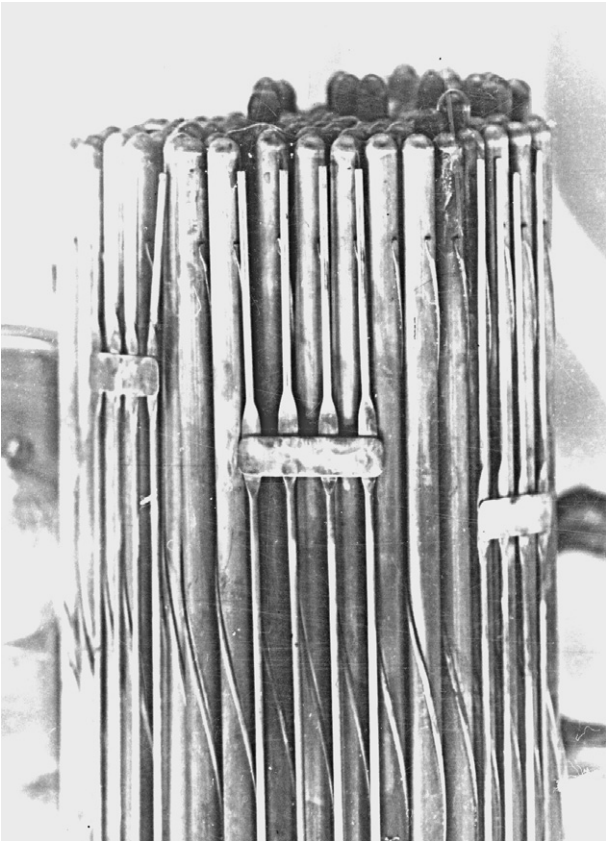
View of the top end of the fuel pin bundle of the P-34 subassembly [11].
